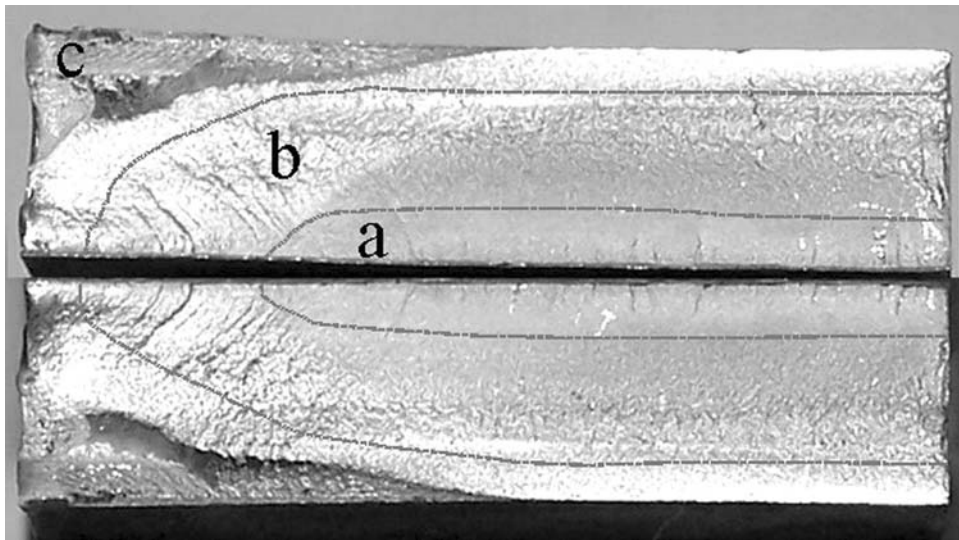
Macrograph of fracture surface (a) crack initiation; (b) stable crack growth; (c) final fracture.
